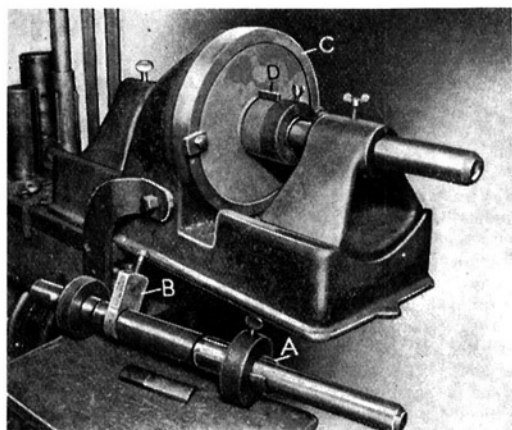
Fixture used in babbitting Elevator Worm-shaft Bearing Thrust Box
